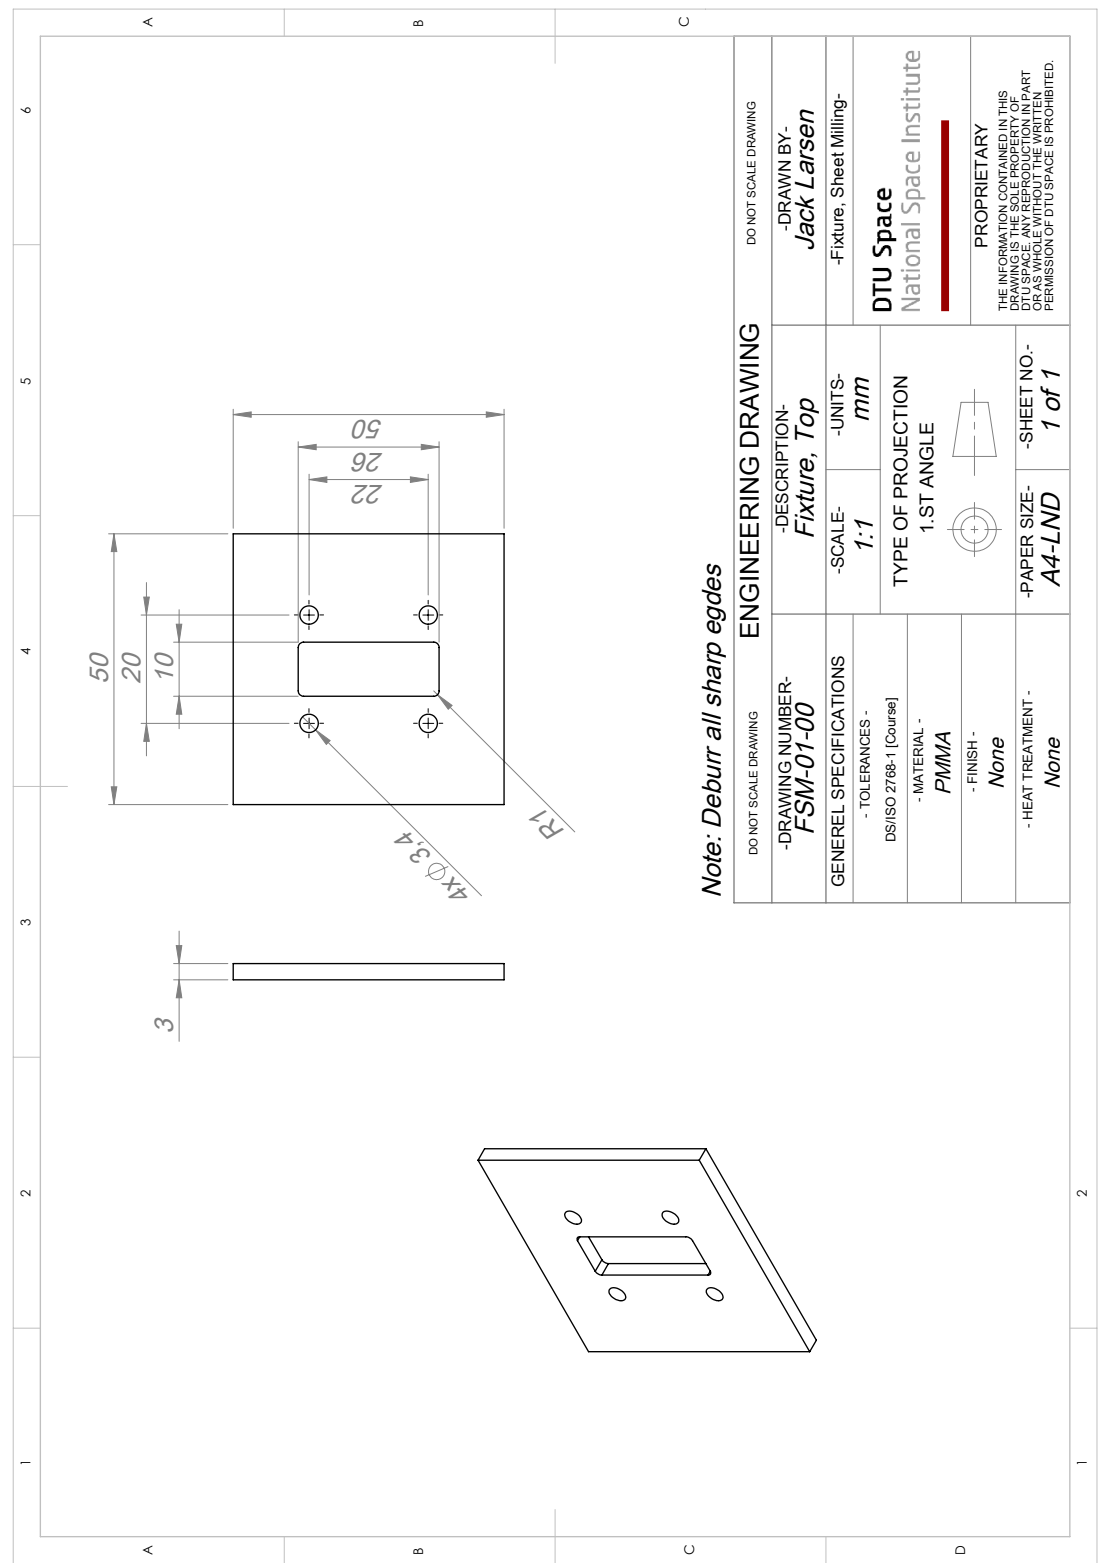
Milling Tools: Fixture Sheet Milling, Top. Fixture used for milling the sheets for the heaters of design D13 and D14.
